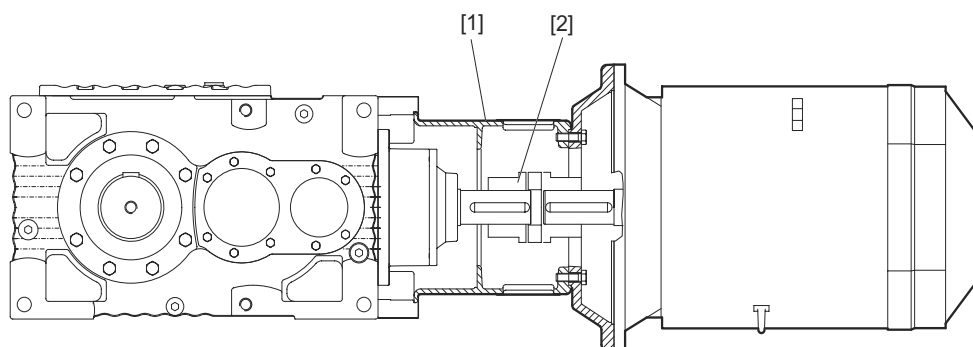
Motor adapter for MC.R.. industrial gear units 51593AXX
